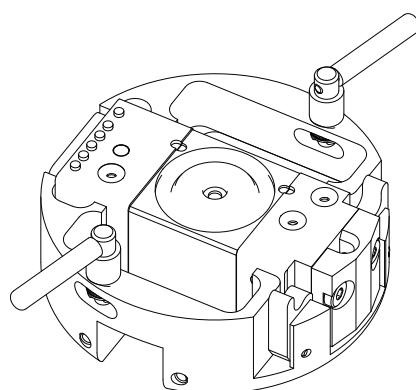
Electrode assembly with unlocked levers (front and right side)
